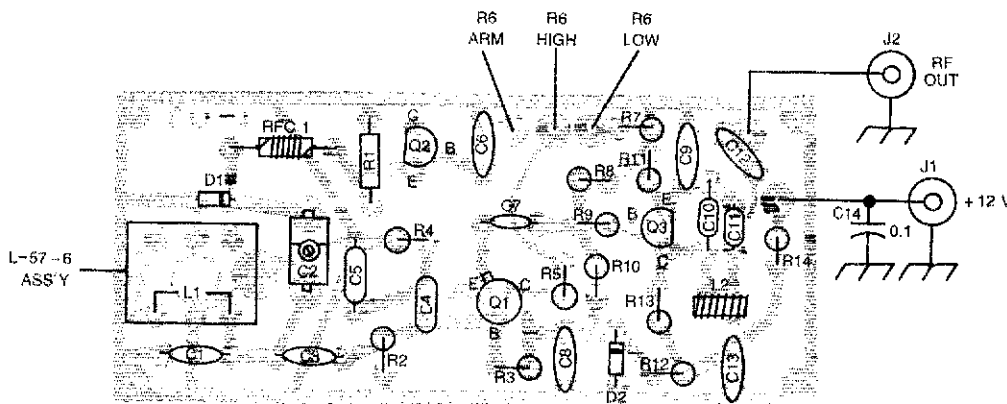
Parts-placement guide for the VVC-tuned 40-m VFO. Parts are placed on the nonfoil side of the board; the shaded area represents an X-ray view of the copper pattern.
